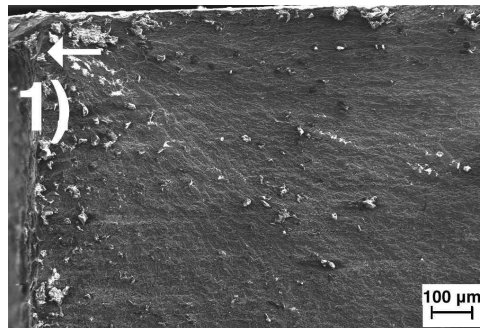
Initiation point in the top left corner of the fatigue crack of AA6082.50-T6 as welded.
